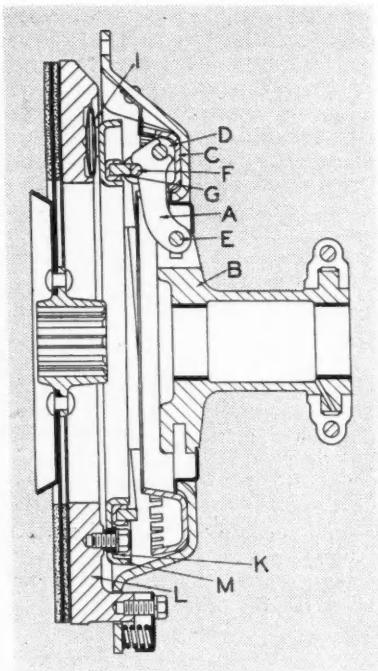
Sectional view of Atwood constant-pressure clutch.
